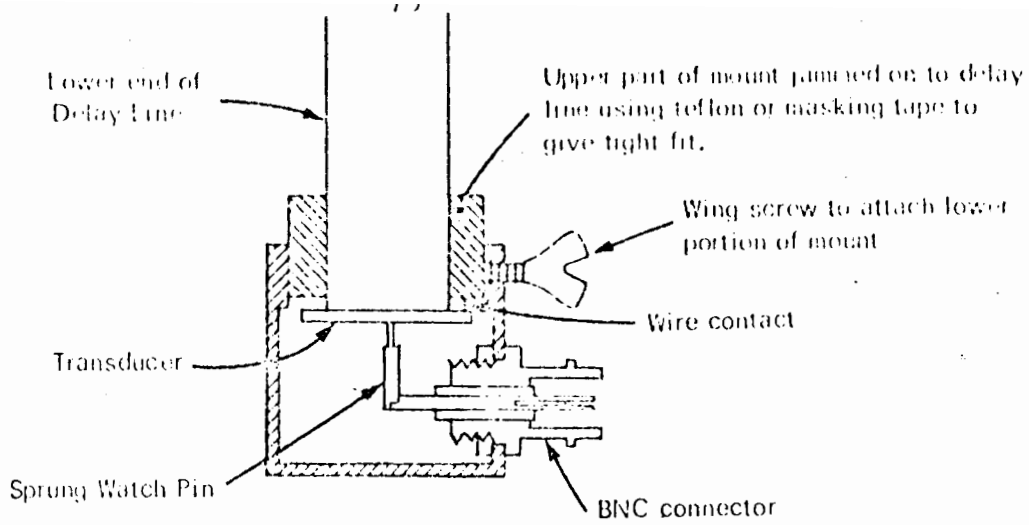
Transducer Mount #1 in cross-section. Lower part of mount is 1/16" thick copper. Top part is brass.
